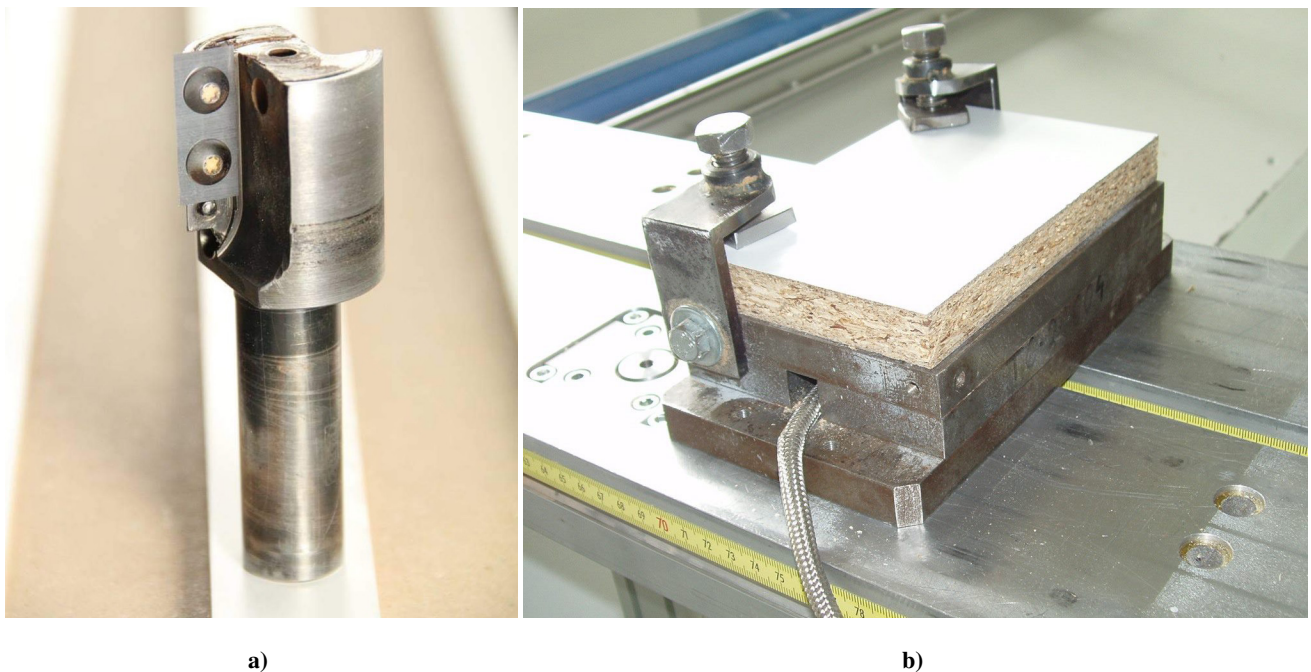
Edge cutter head (a) and example of chipboard piece mounted on the machining centre (b)
